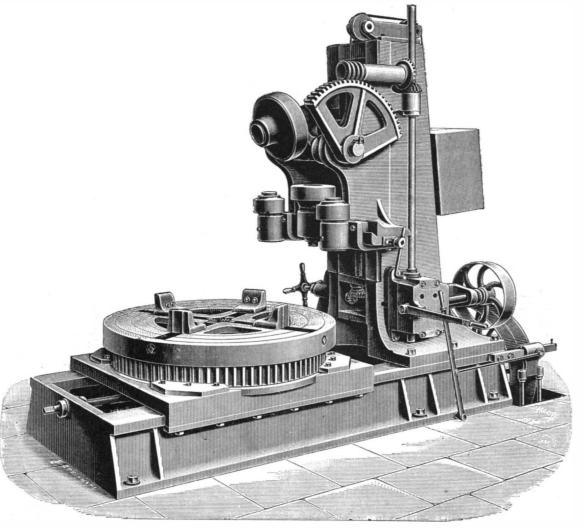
PLATE FLANGING MACHINE FOR MARINE BOILER WORK.
